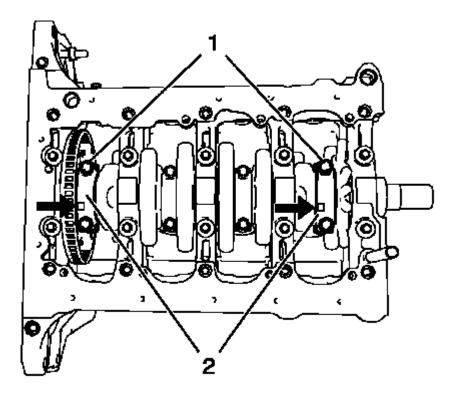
Connecting Rod Bearing Caps And Bolts Courtesy of GENERAL MOTORS COMPANY
